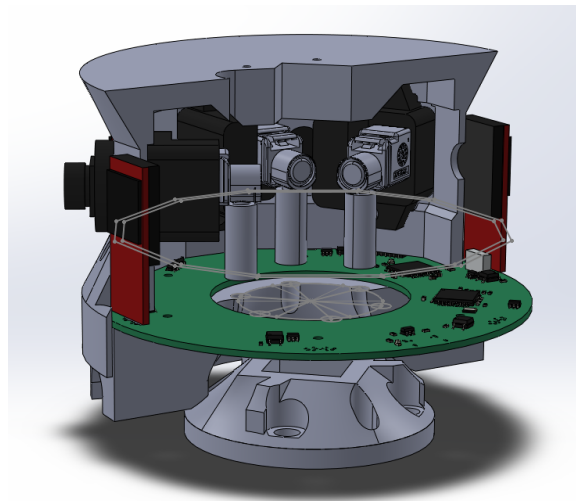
The CAD model of the entire assembly of the radar-camera system
